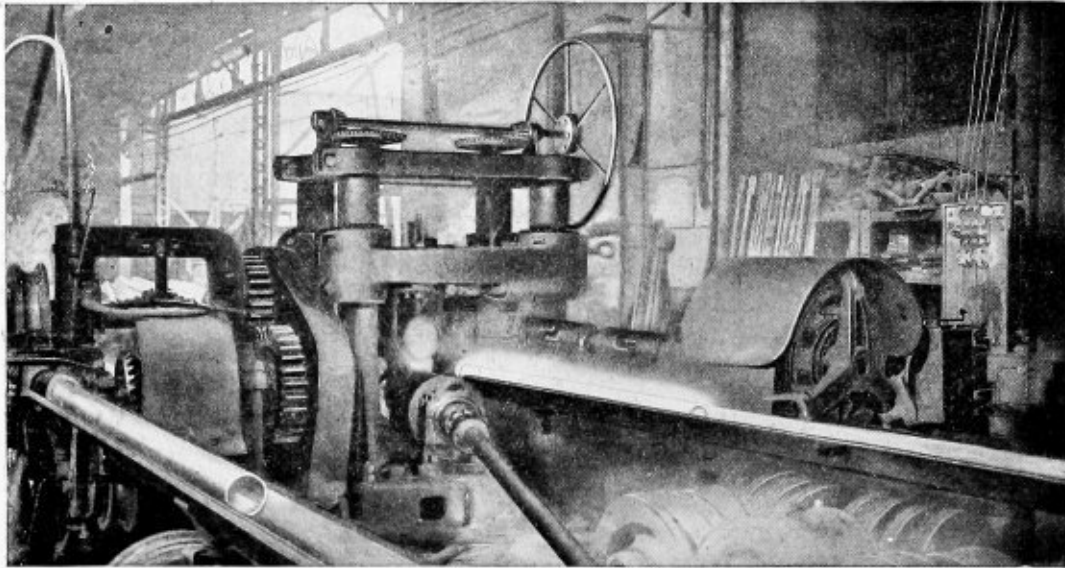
LAP-WELD BOILER TUBES PASSING THROUGH SIZING AND CROSS ROLLS.
